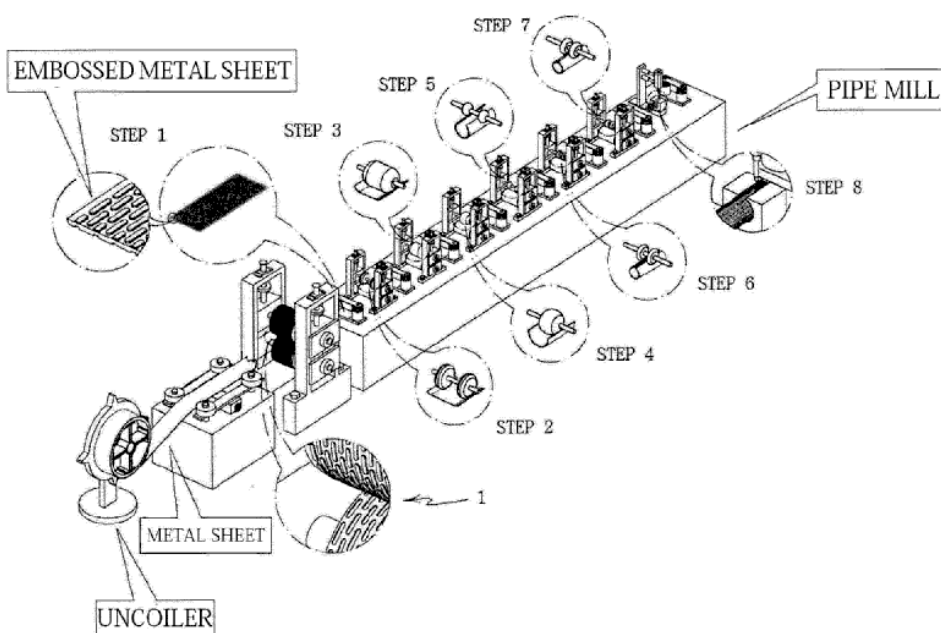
illustrates a pipe mill that uncoils a metal sheet and embosses (1) the metal sheet in step 1 and then advances the metal sheet in successive steps to seam and bend the embossed metal sheet into a tube/pipe.
